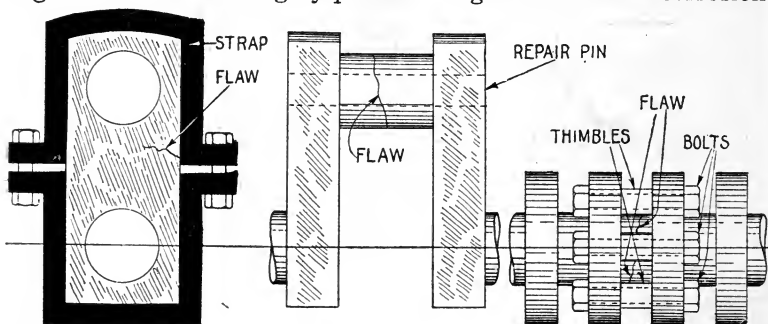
,335.—Repair of flaw in *crank web*. Two iron or steel strips, say about 2 inches thick, are heated and shrunk on, then bolted as shown. The bolts should be as large as possible, for ordinary size of shafting about $2\frac{1}{2}$ inches diameter, but larger than this if they can be obtained. Coupling bolts would do very well in most cases.
